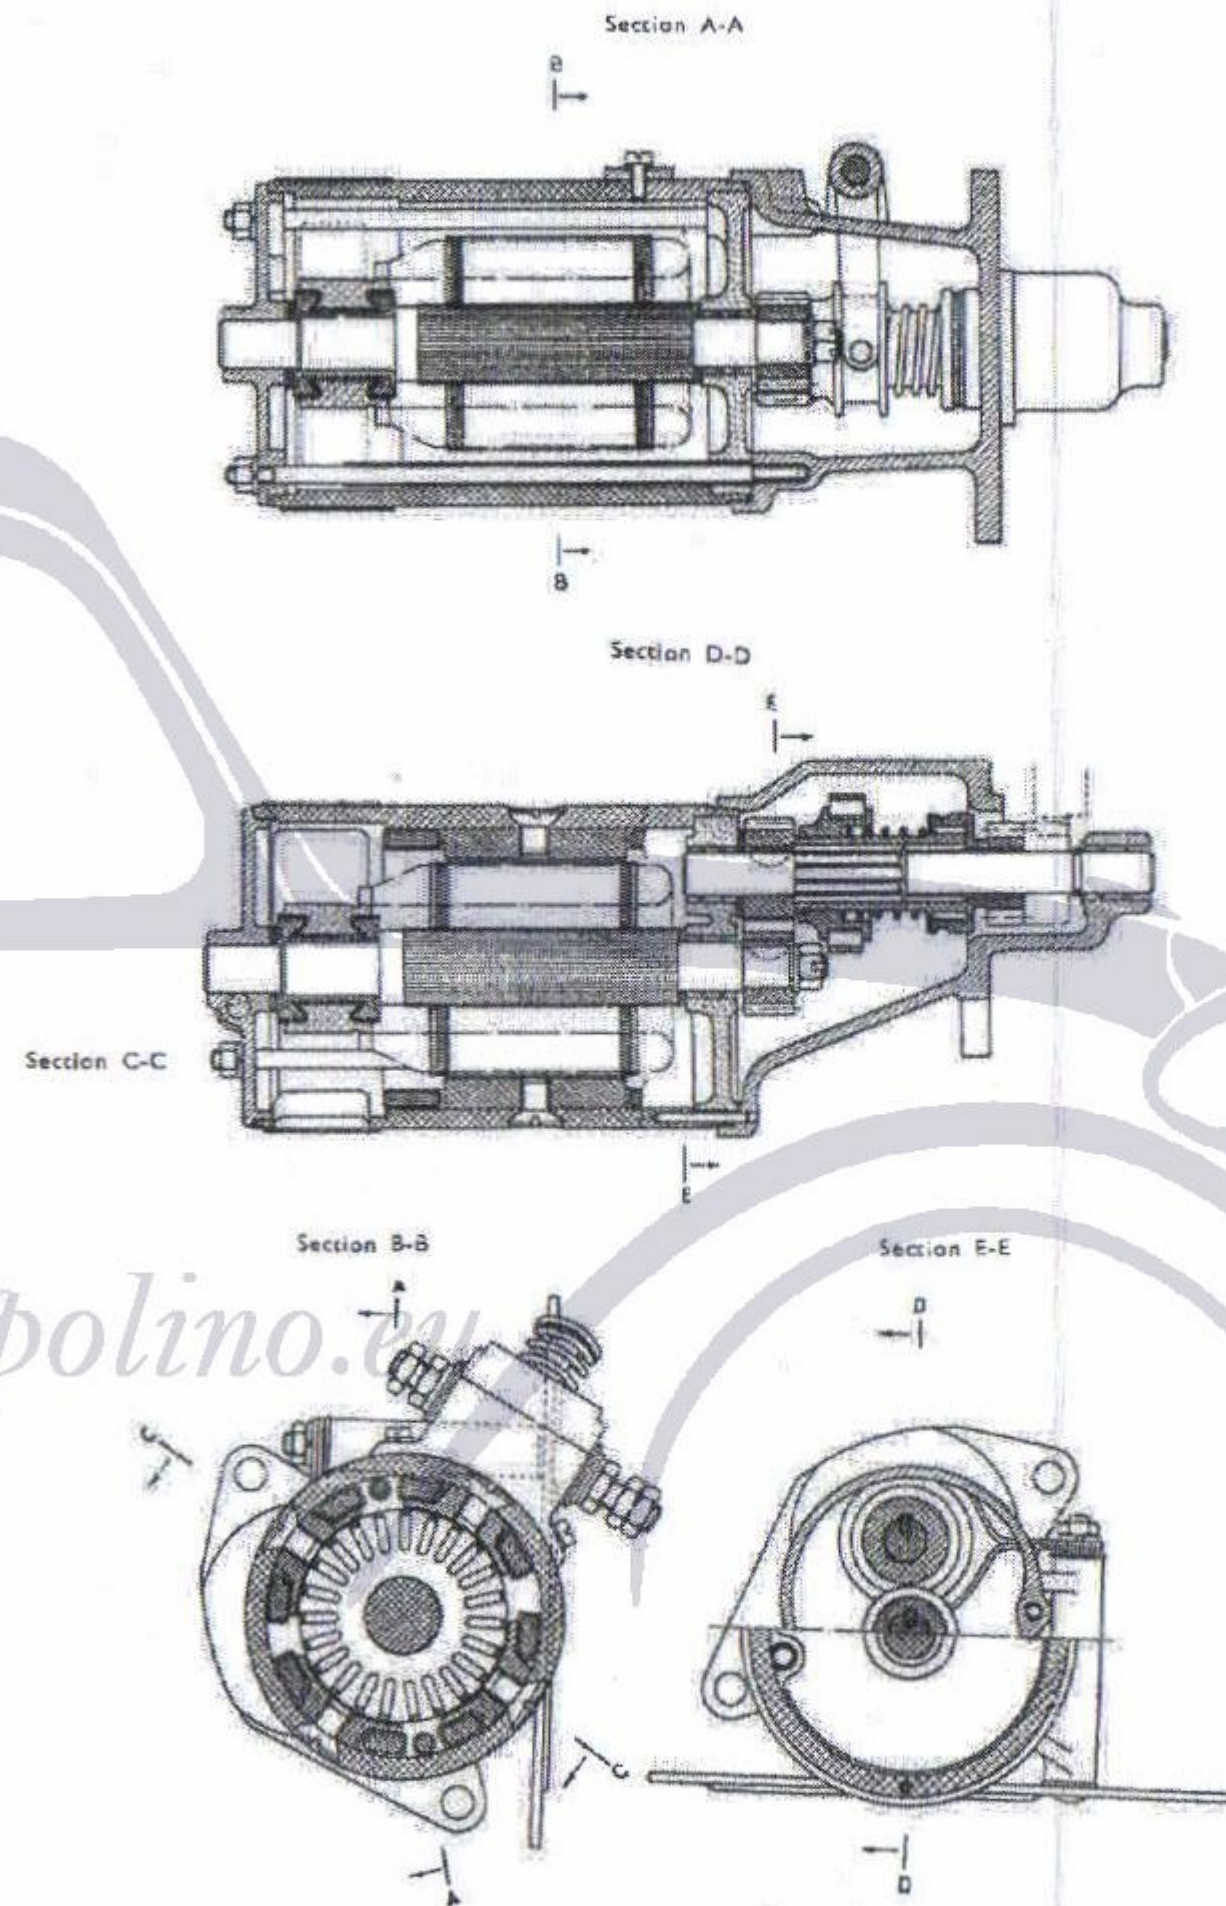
Cross sections of the starter motor (type fitted from engine No. 033509).
